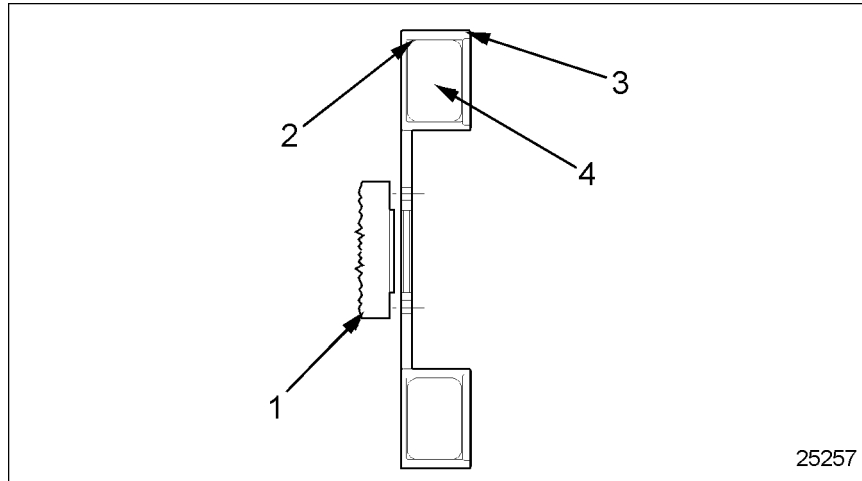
Viscous Vibration Damper Mounting with Crankshaft Pulley or Crankshaft Pulley and Hub Assembly with Spindle
